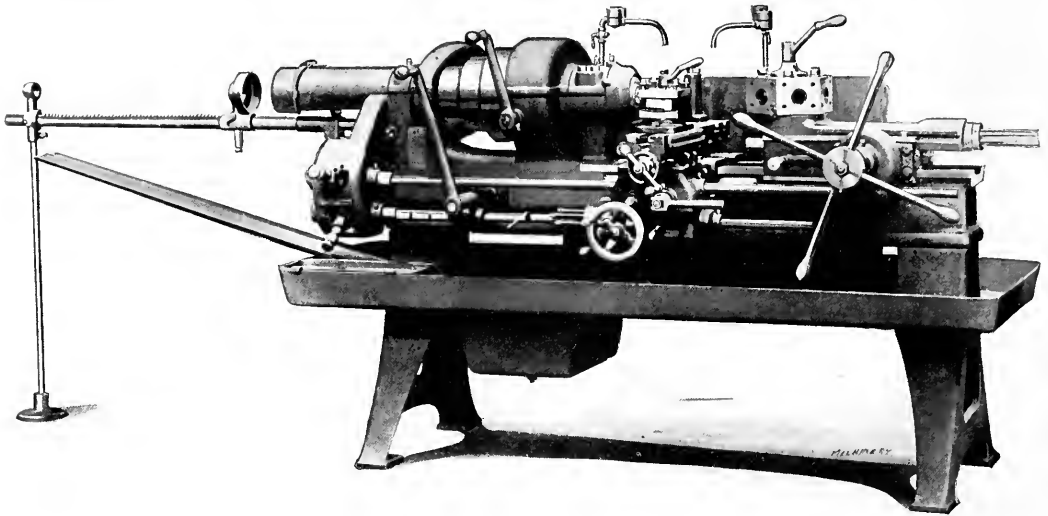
Warner & Swasey No. 4 Universal Turret Screw Machine with Bar Equipment and Cone Pulley Drive
